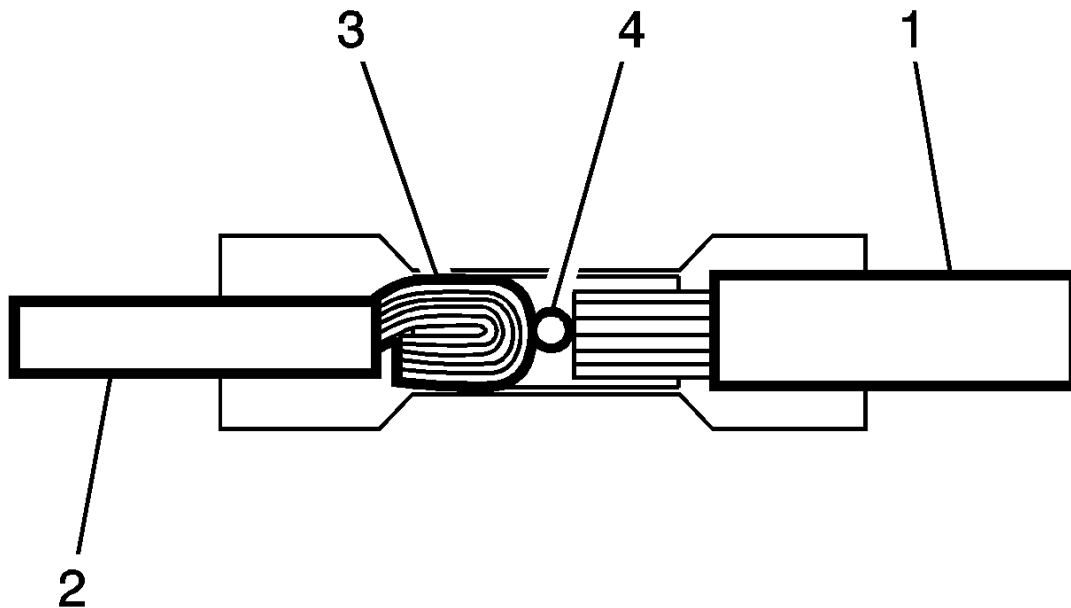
View Of Stripped Wires In Splice Sleeve Connector
